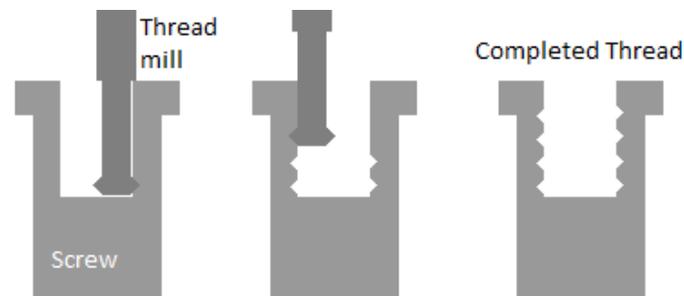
Schematic of the cutting of the 0-80 thread within the outer screw pilot hole.
